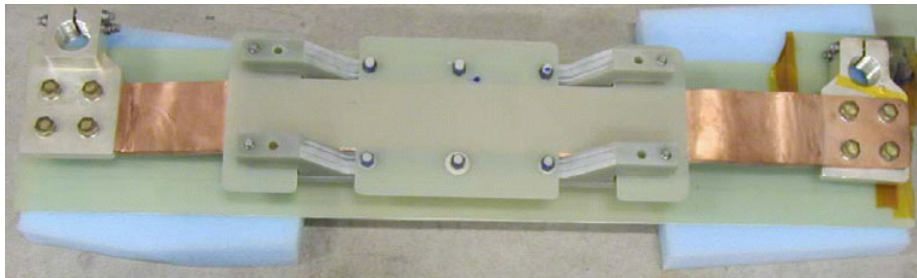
Horizontal portion of the failed HV bus. The left end connects to a threaded copper rod that is part of the HV bushing that penetrates the vacuum vessel top plate. The right end connects to a threaded copper rod, which penetrates the thermal shield. The green colored G-10 is used to support the copper sheets of the conductor.
